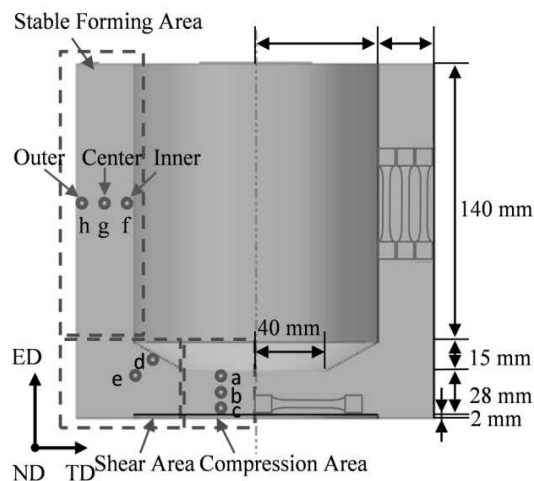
The three-dimensional schematic and sampling diagram of back extruded cylindrical samples
